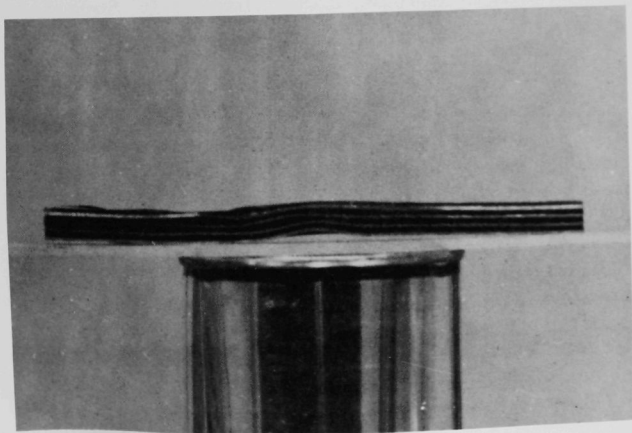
Buckling in Element 15, Superheater Fuel Assembly C-3, Core CSH-1
